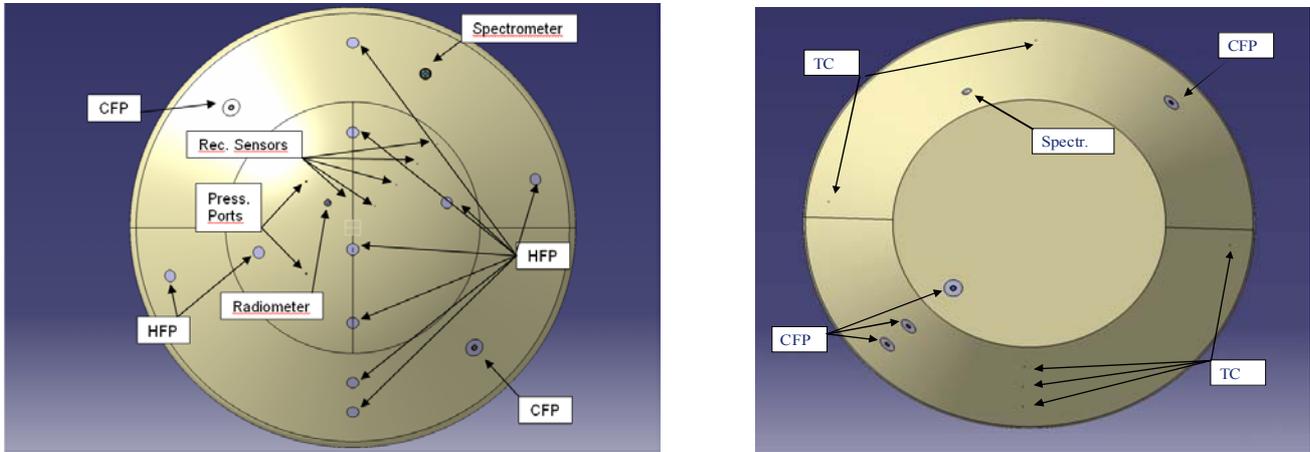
RADFLIGHT Instrumentation Package Layout inside CV: Front Side (left) – Back Side (right)
